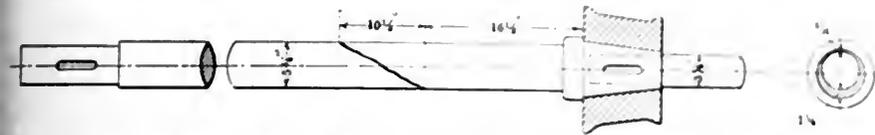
BREAK IN LOW-PRESSURE PISTON ROD DUE TO IMPERFECT WELD
